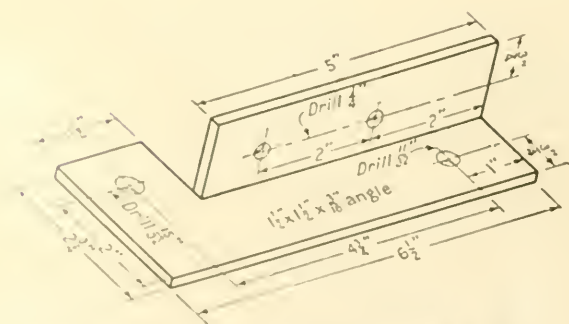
Under front throat spring bracket, Case-Osborne corn binder
